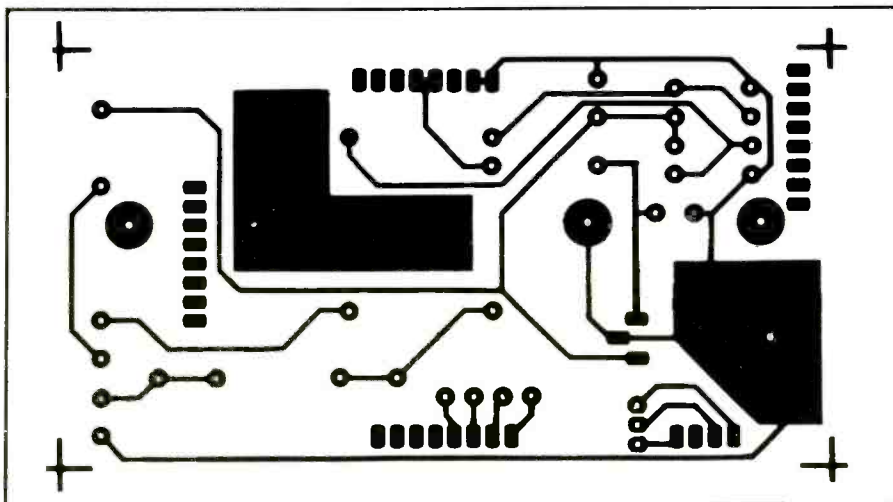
Actual-size etching-and-drilling guide for the 5-volt power supply.
